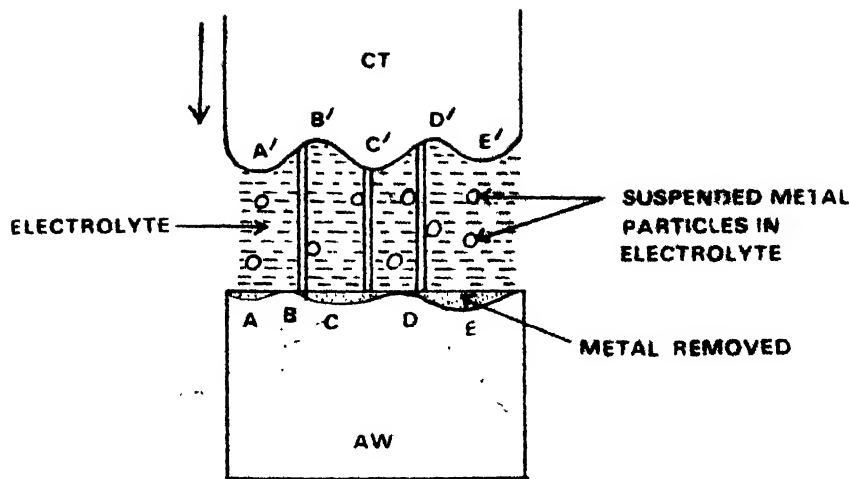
Formation of contours in machined workpiece; CT.-Cathodic toolpiece; AW.-Anodic workpiece
